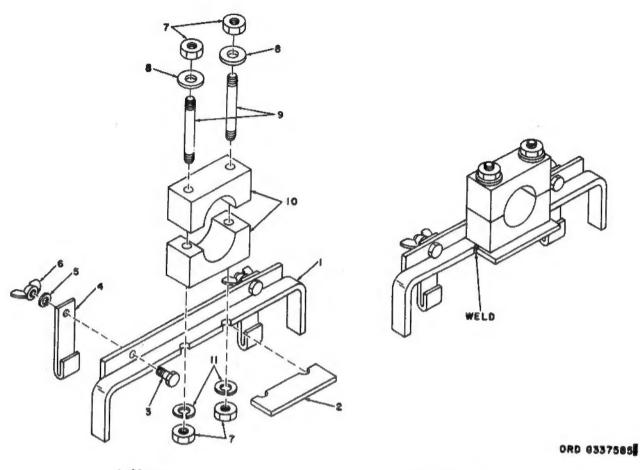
Cylinder assembly holding fixture-fabrication.
